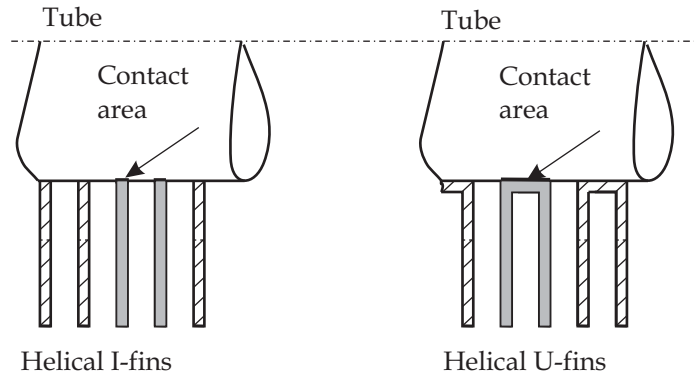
Contact Area of I-shaped and U-shaped Finned-Tube
